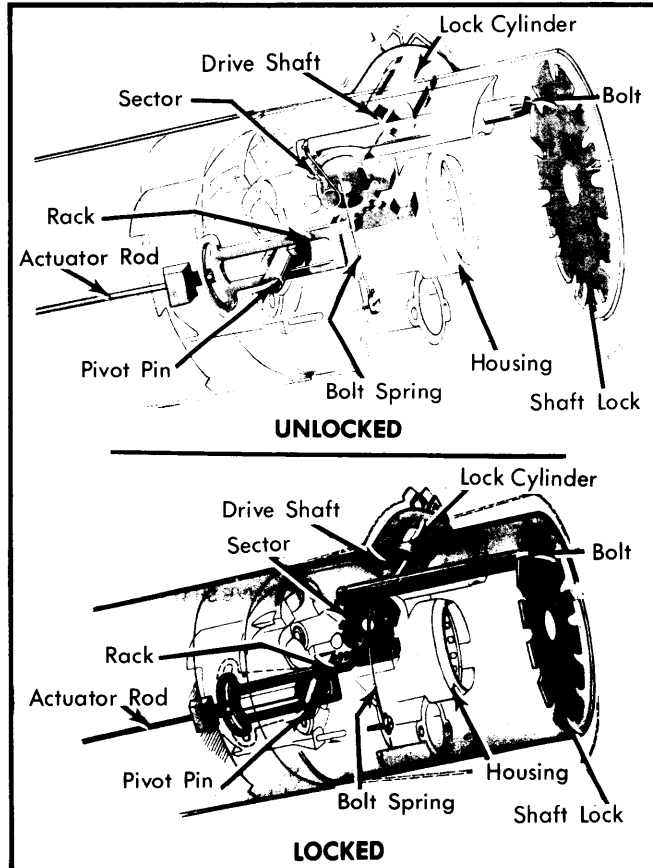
General Motors Steering Column Locking Mechanism (Others Similar)
